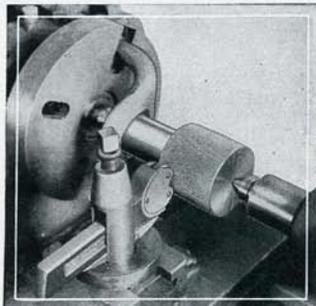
Knurling a Large Handle Held Between Lathe Centers
